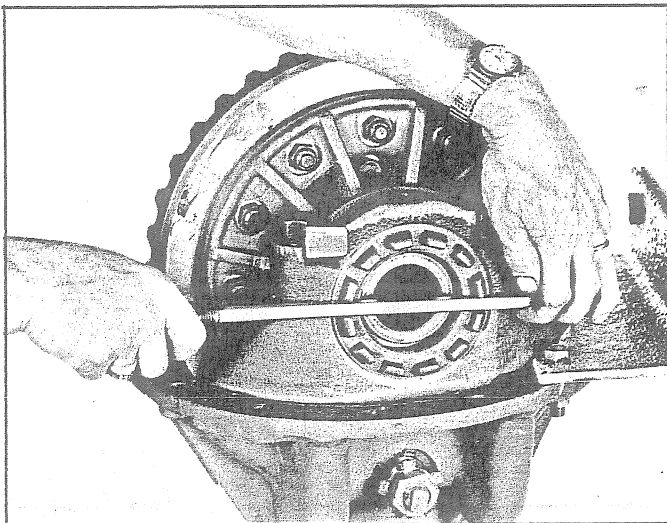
Adjusting Bearing Preload and/or Backlash
